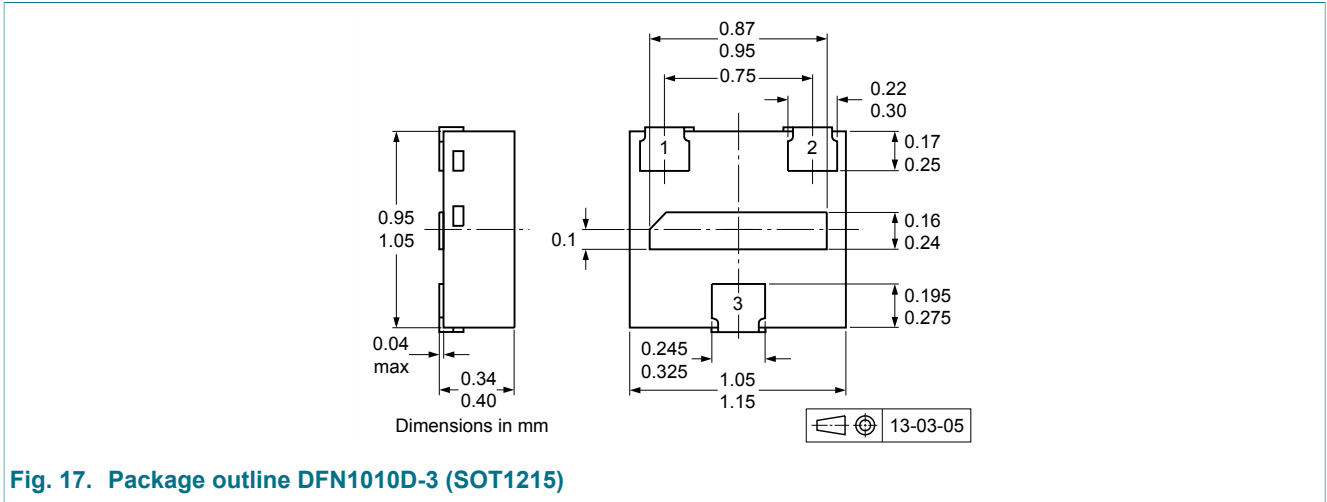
Package outline DFN1010D-3 (SOT1215)
